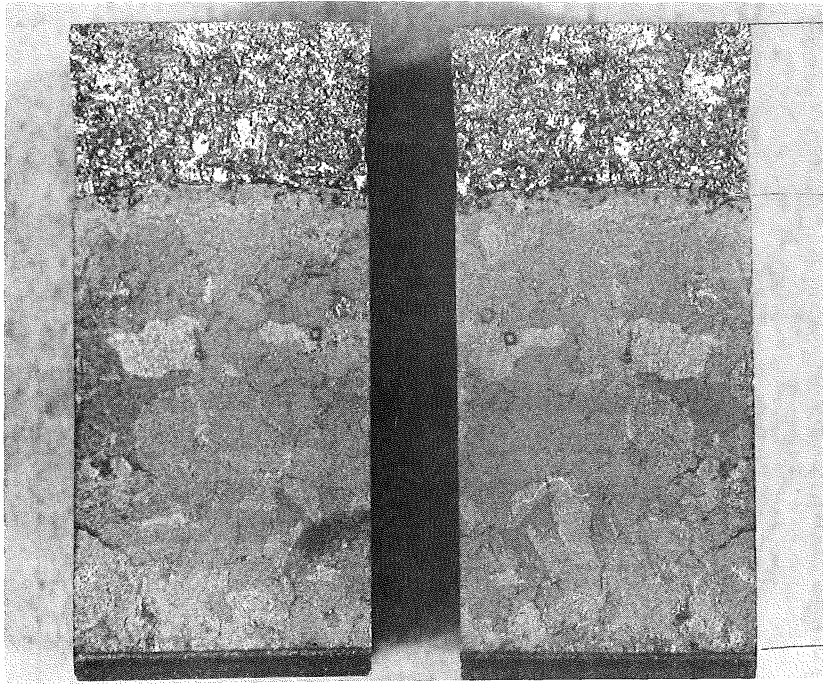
Topographic features of a fatigue crack through zone II weldment.
